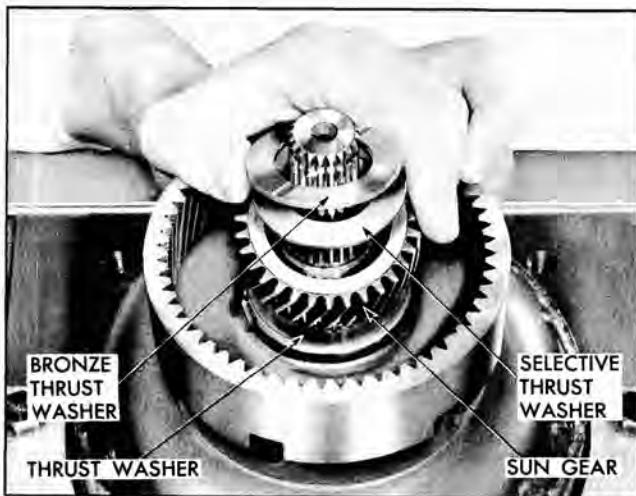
Installing Sun Gear and Selective Washer for Front Unit End Clearance Check
